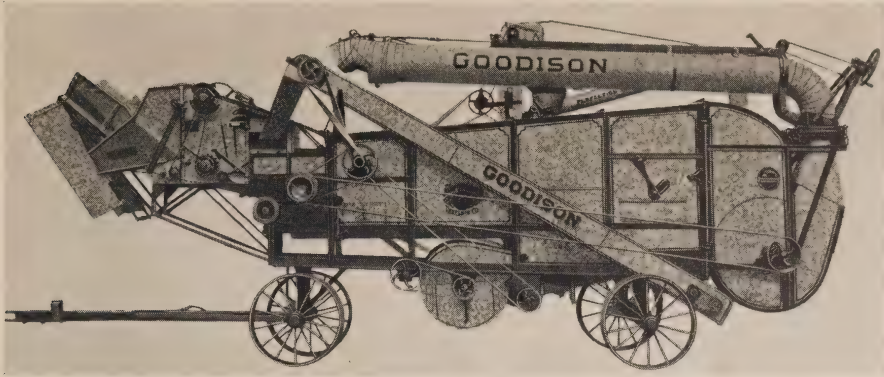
The main drive side of the 22 in. by 38 in. machine, with all steel frame and body. It has been suggested that improvements might be made in some of the drives by using roller chain and sprockets or V pulleys and V belts on a few where the centres are short and the power required small. Improvements in the windstacker by lowering the speed and decreasing the size of the windstacker pipe would permit the use of a smaller belt. This form of drive through the drum cylinder to other parts seems to be universal by most manufacturers.
